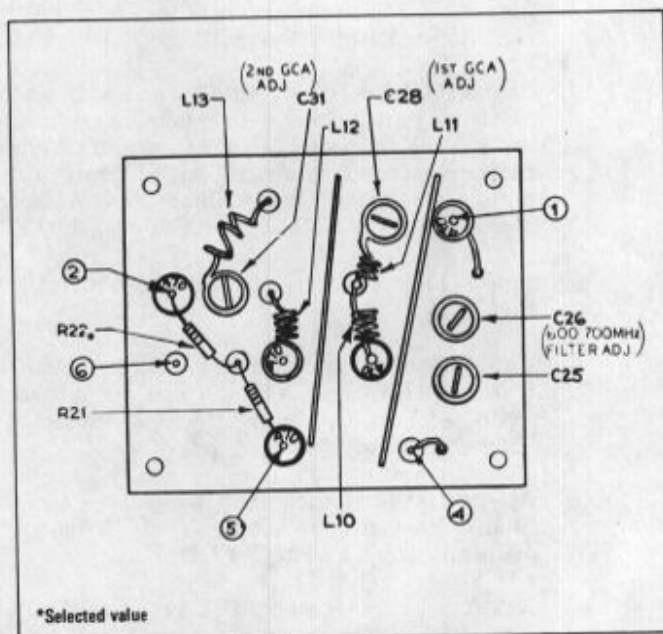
Trimmer Locations, GCA/AM Assembly, A7
